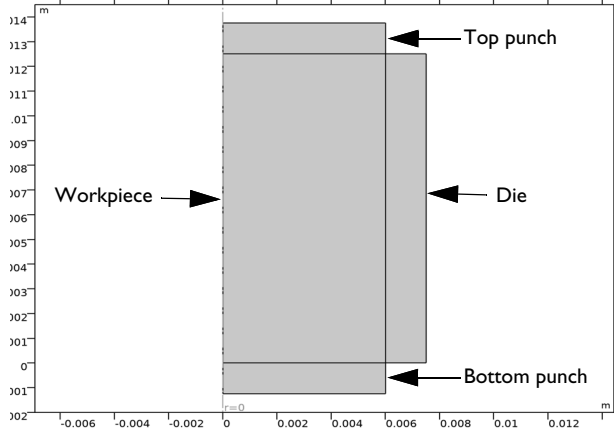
Geometry of the workpiece (pharmaceutical powder), punches, and die.
